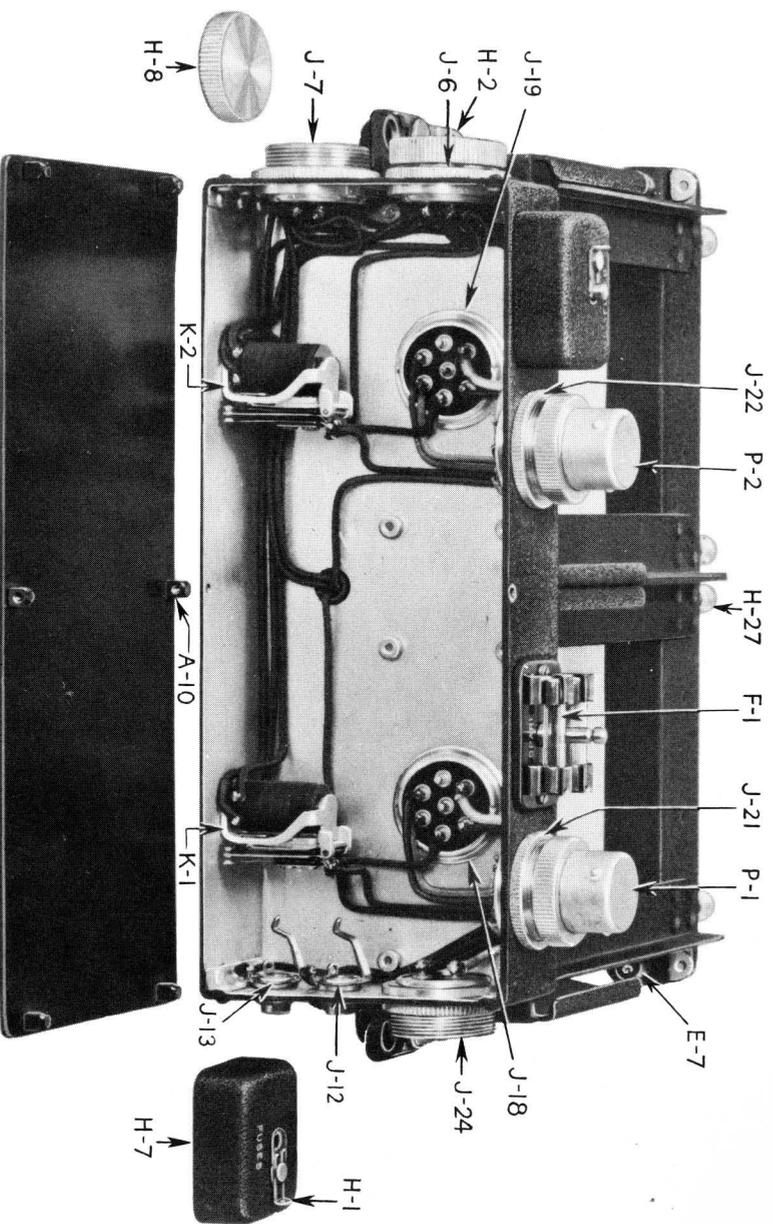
TYPICAL RECEIVER RACK, REAR VIEW, WITH COVER REMOVED
